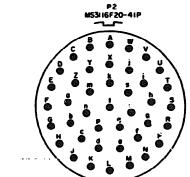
Cable Assembly, Special Purpose, Electrical Branched CX-12719/AYM-8, wiring diagram.
